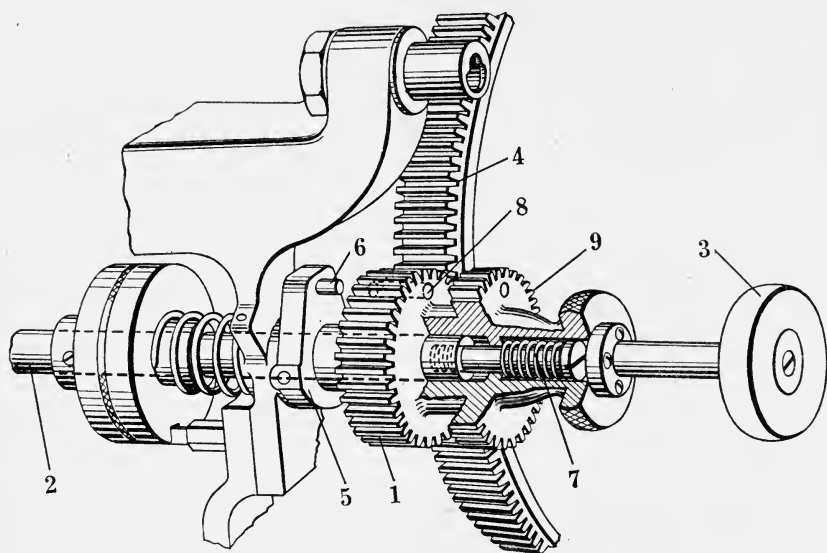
Changing the Mold. Showing how it is possible to disengage the mold driving pinion in order to change from one mold to another. This mold disk pinion is geared to the mold disk at a ratio of four to one. The mold disk is four times as large as the small driving pinion. When the mold disk is entirely disengaged from the small pinion, always return them to mesh so that the punch marks match. There is one punch mark on the edge of the small pinion face and four punch marks (one every quarter turn) on the edge of the mold disk. These two gears must always be properly timed by matching the punch marks, or the mold turning apparatus will throw the mold disk studs out of time with the stud blocks in the vise frame.
